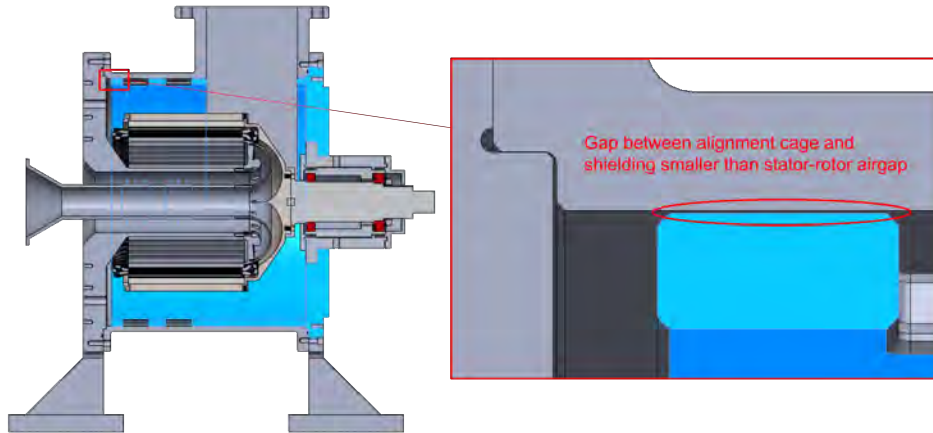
Alignment cage to avoid collision between rotor and stator during assembly and disassembly is part of forward frame (highlighted in blue)
